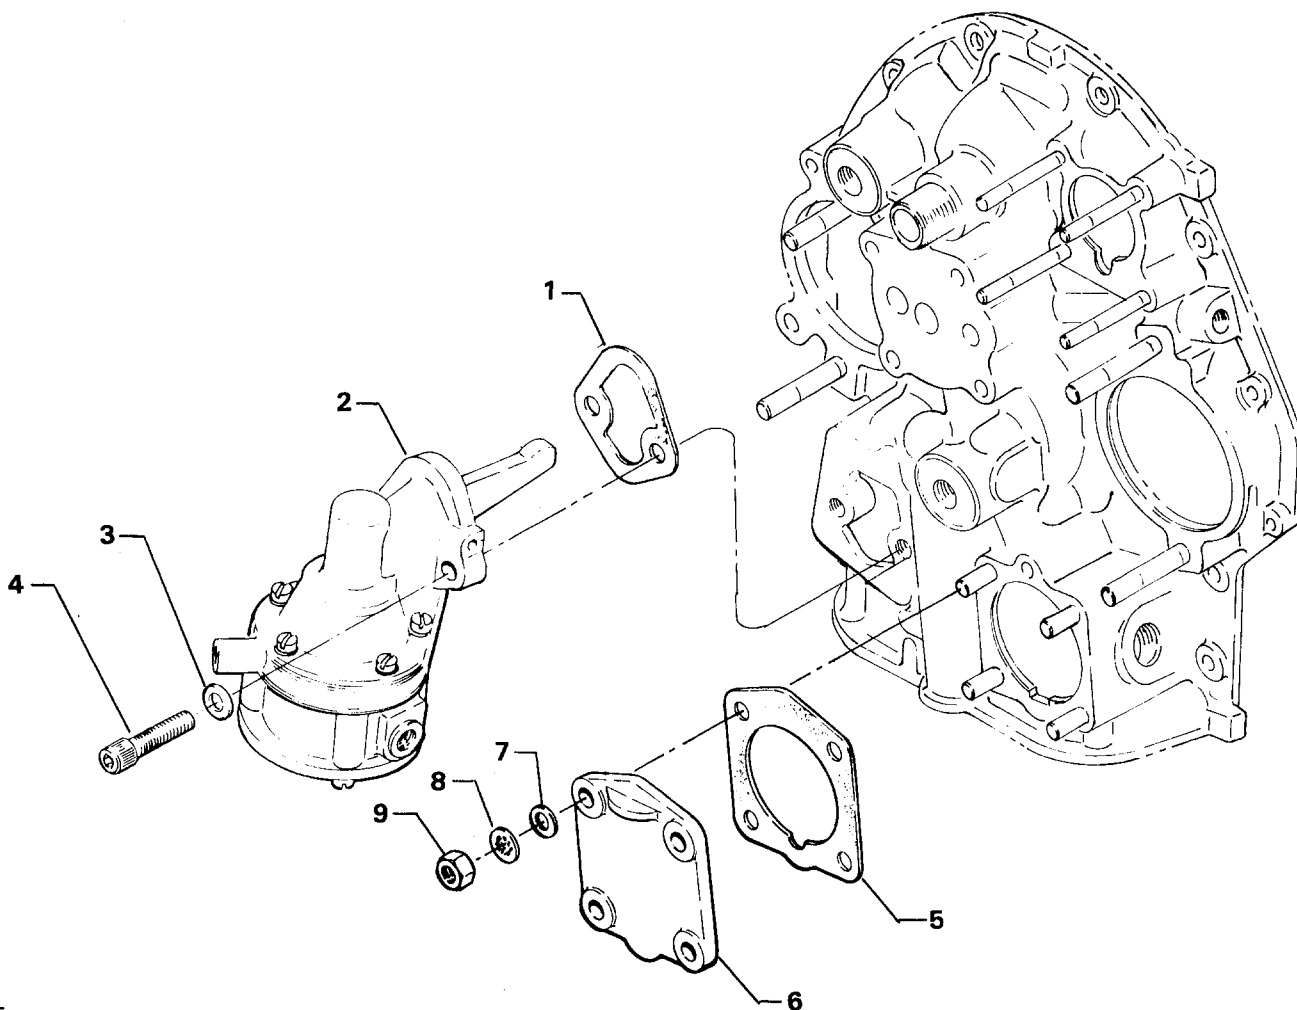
OIL PUMP AND ACCESSORY HOUSING ATTACHING PARTS
